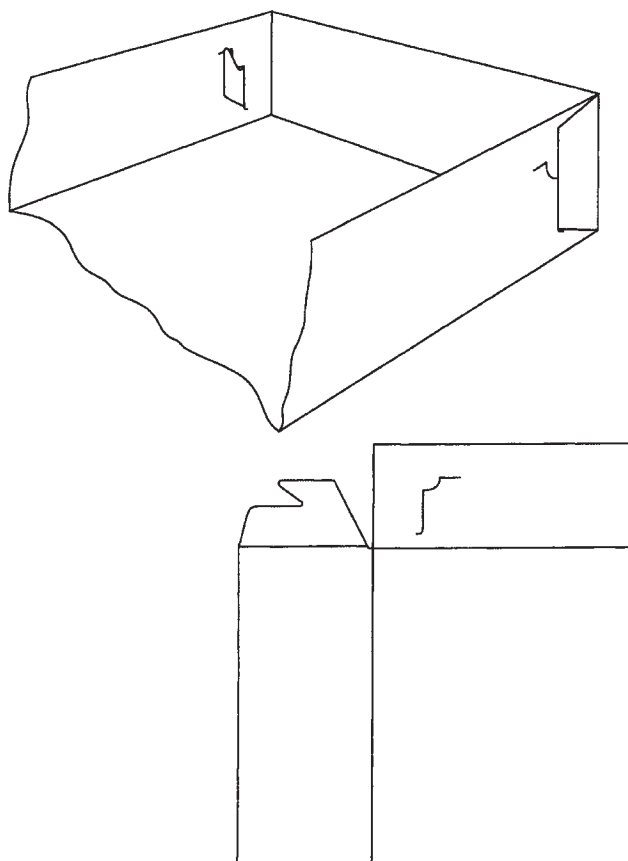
Common stripper-lock design: (a) assembled; (b) unfolded.
